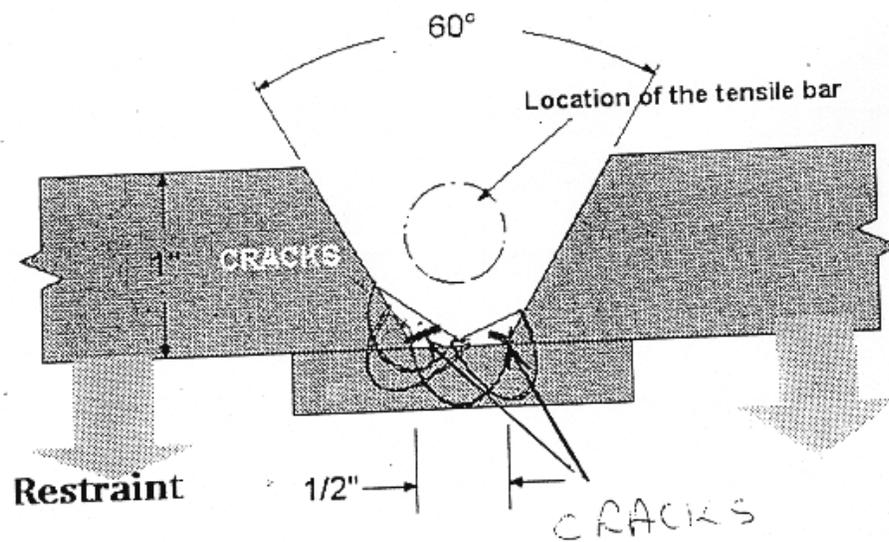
Schematic representation of the possible mechanism for cracking at the root of the weld when the A 36 backing bar was improperly used.
